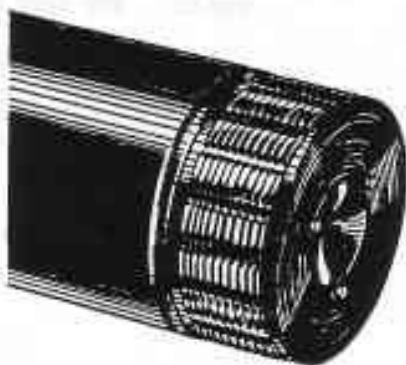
"BENTLEY" TYPE AIR CLEANER.
